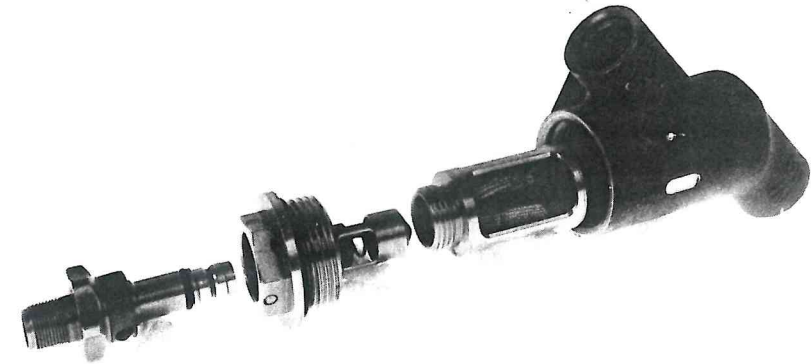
Full-flow debris collector. (Courtesy of Technical Development Company, Glenolden, Pa.)
